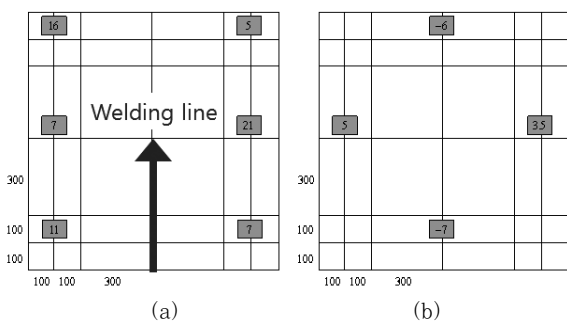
Angular distortion of experimental model, in mm (a) front side 1 layer-welded specimen, (b) back side 1 & 2 layer-welded specimen
